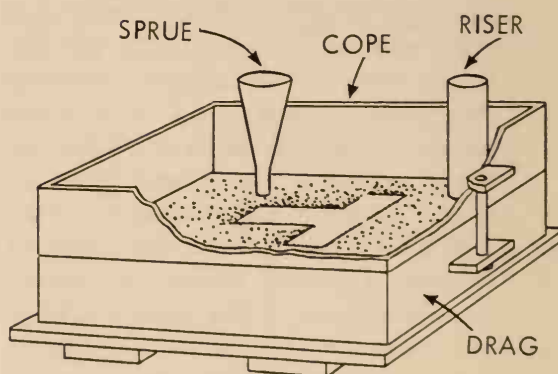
Cope set on drag with riser pin and sprue pin in place.
